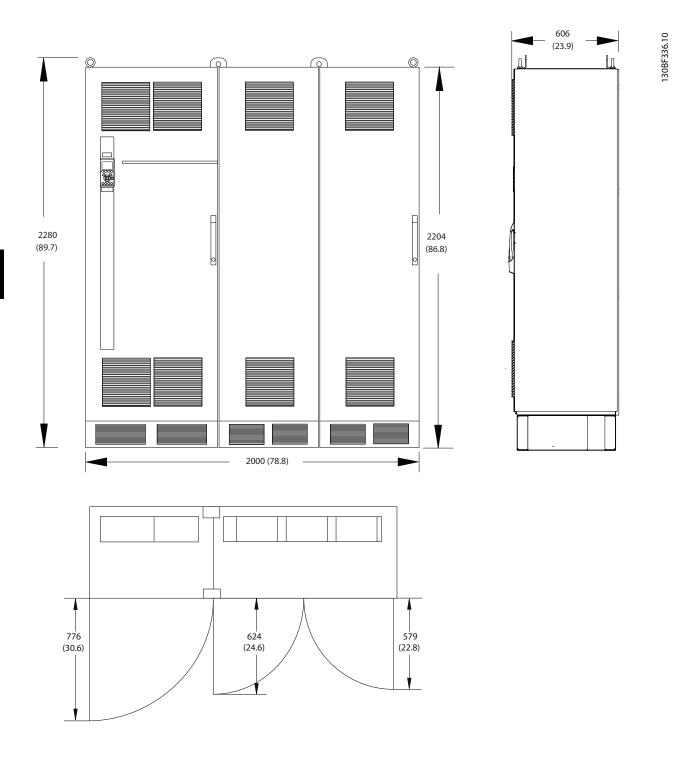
Front, Side, and Door Clearance Dimensions for F12
